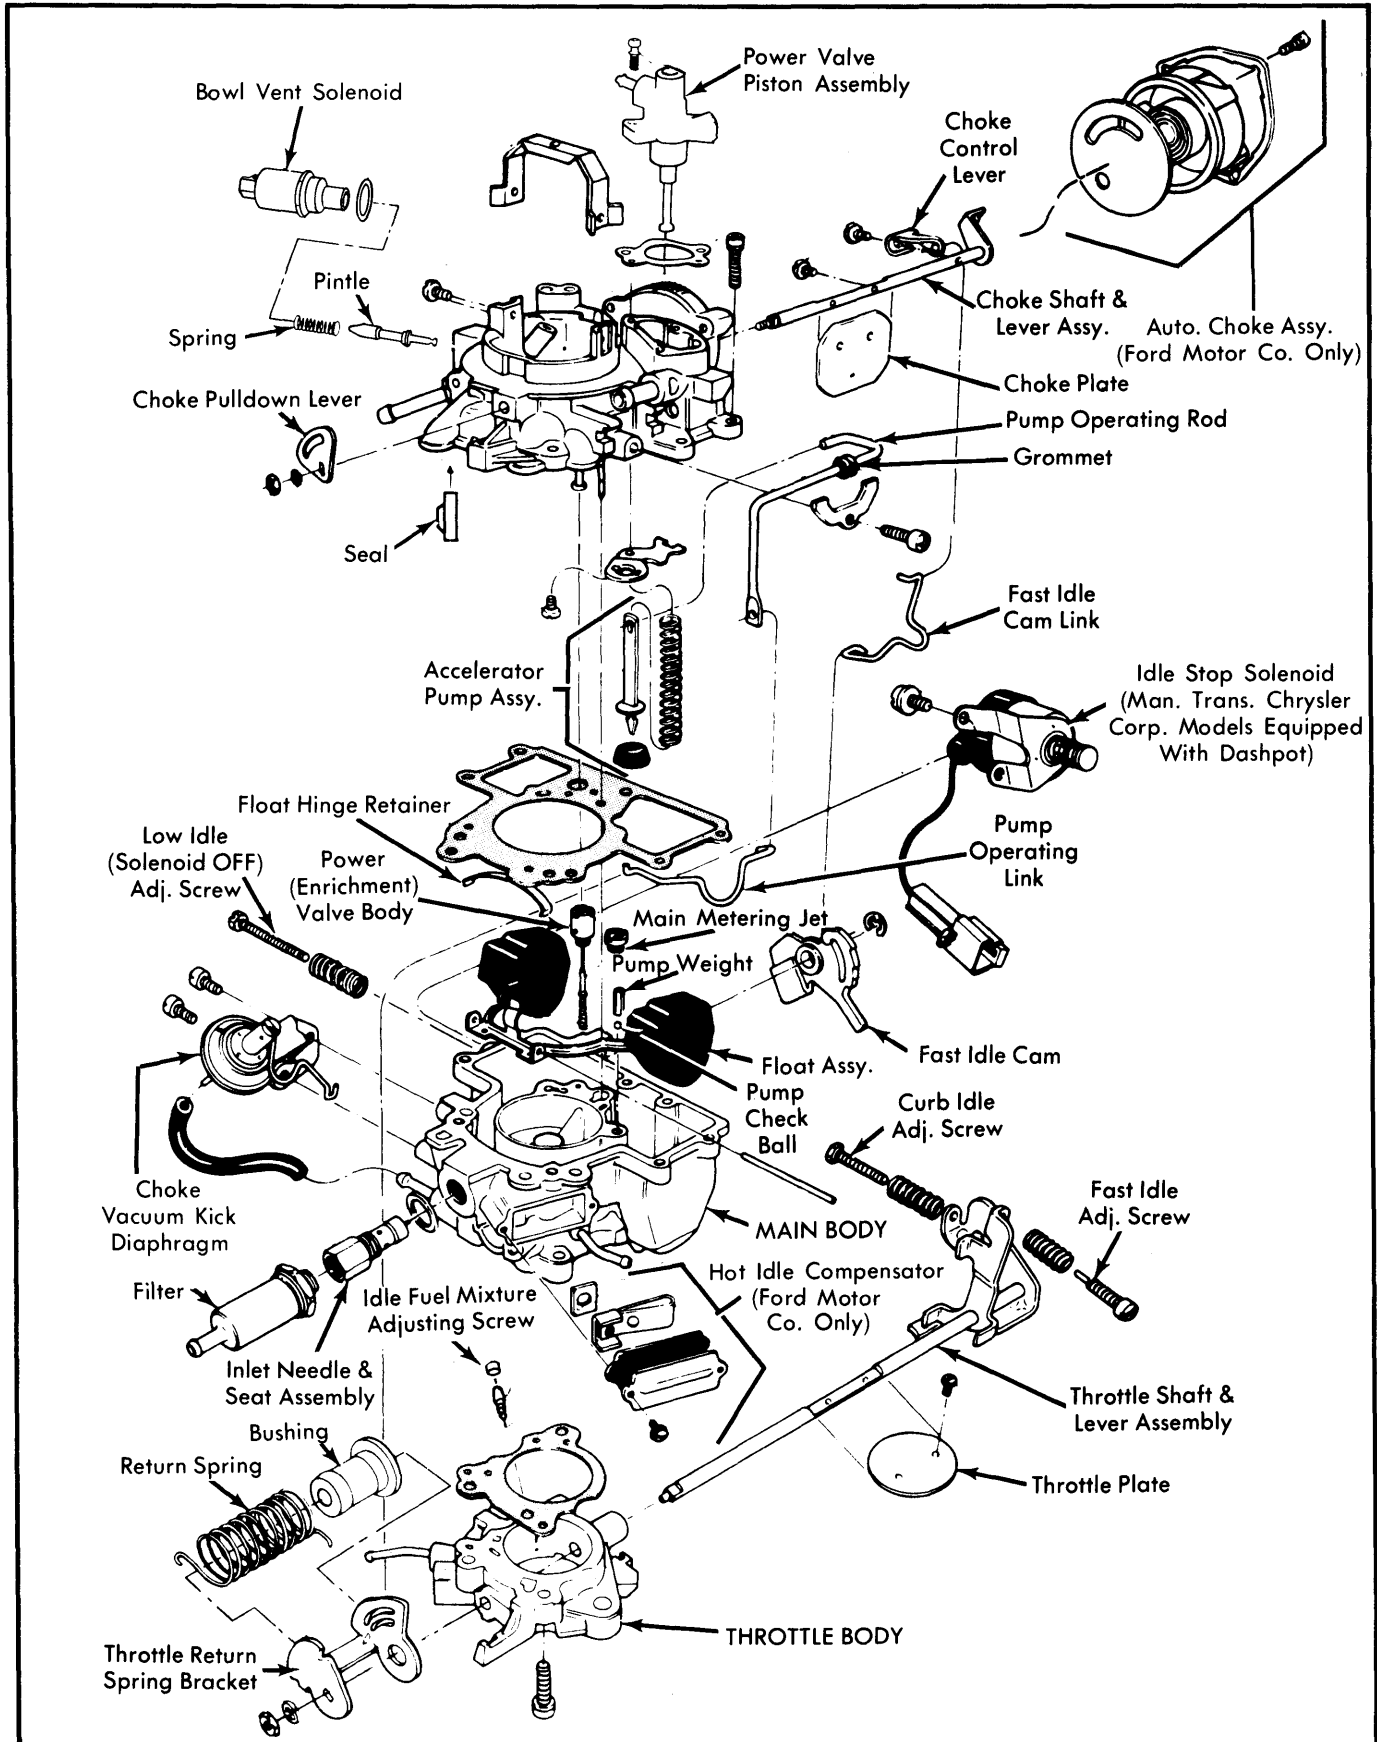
Exploded View of Holley Model 1946 IV Carburetor
